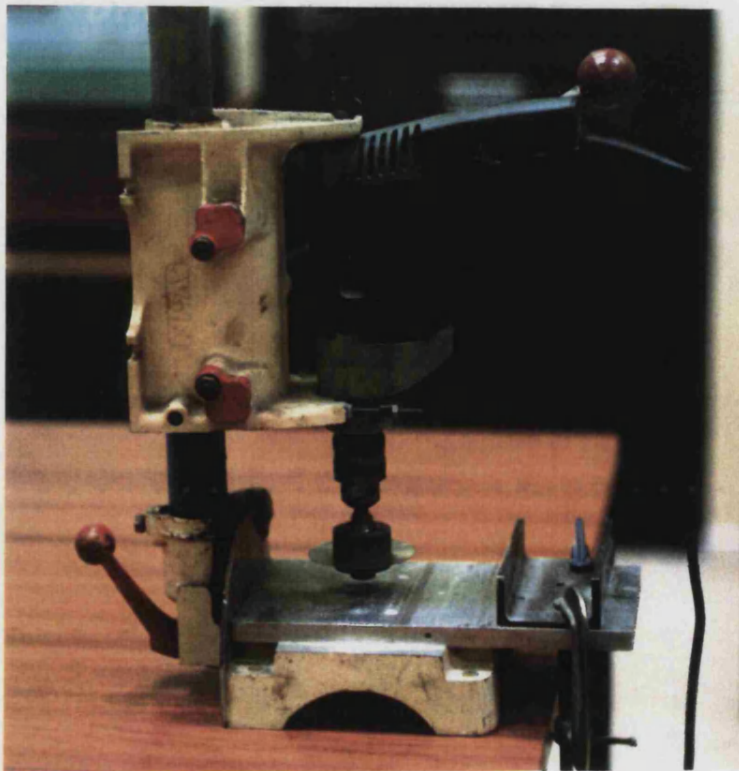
Slitting Saw Arrangement for Notching Work of Fracture Specimens.
